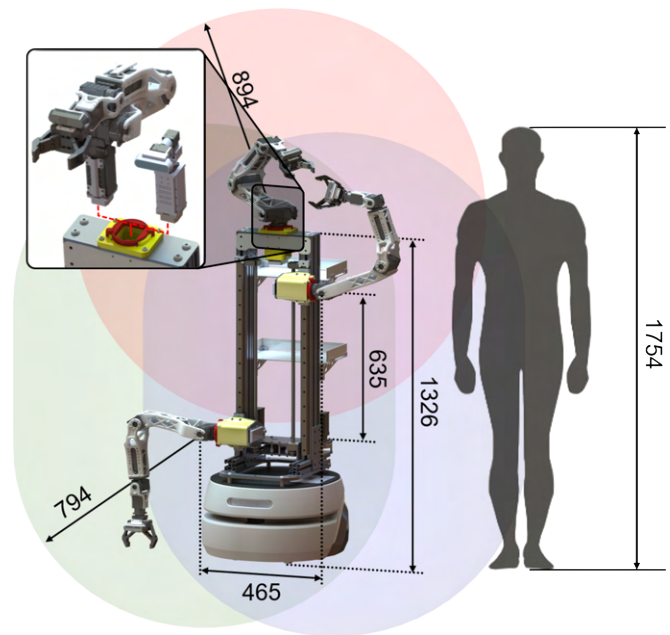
Overall CAD drawing of MOMO System. The workspace of the head mount (Red), Right shoulder (Green), and Left shoulder (Blue) with PAPRAS are illustrated with shaded areas. All dimensional units are in millimeters. As shown, the mounts can take in pluggable devices. These mounts are housed on the left, right, and top of MOMO’s torso. The combined height of the torso and mobile base is 1326 mm, the vertical lift has a range of 635 mm, and the shoulder width, measured between the axes of the second joint of the two manipulators is 465 mm.
